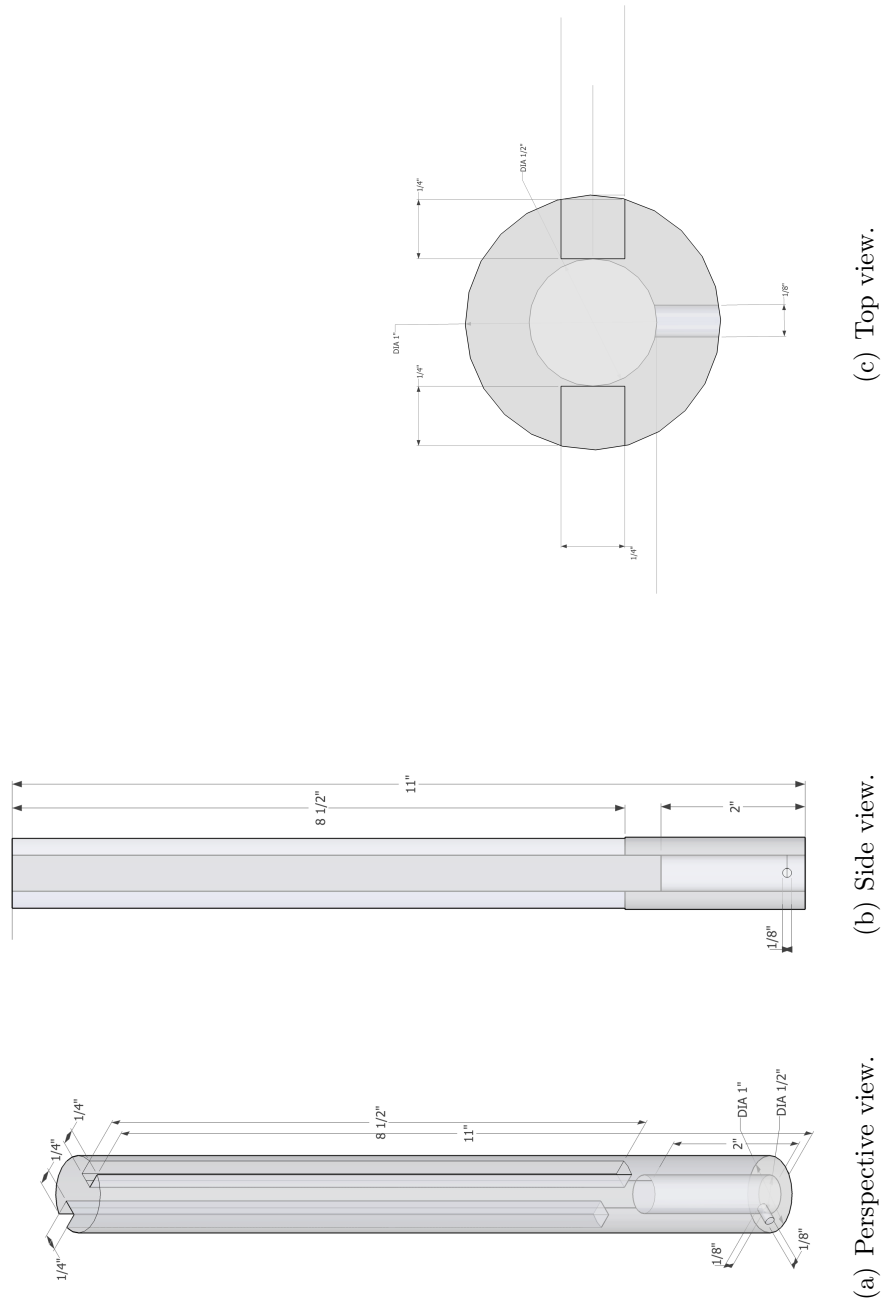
Three dimensional perspective, side view and front view of the box posts.
